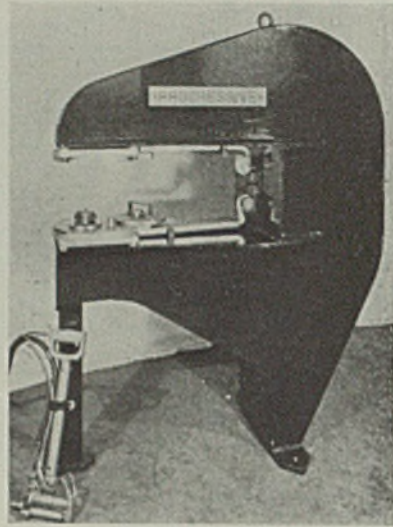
One of the subassembly fixtures built to use one of the standard "push" type guns and timer from the final assembly station
